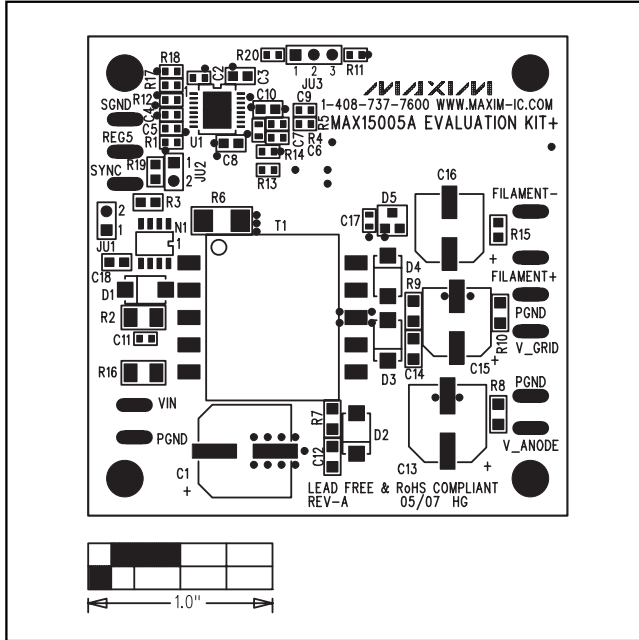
MAX15005A EV Kit Component Placement Guide—Component Side
